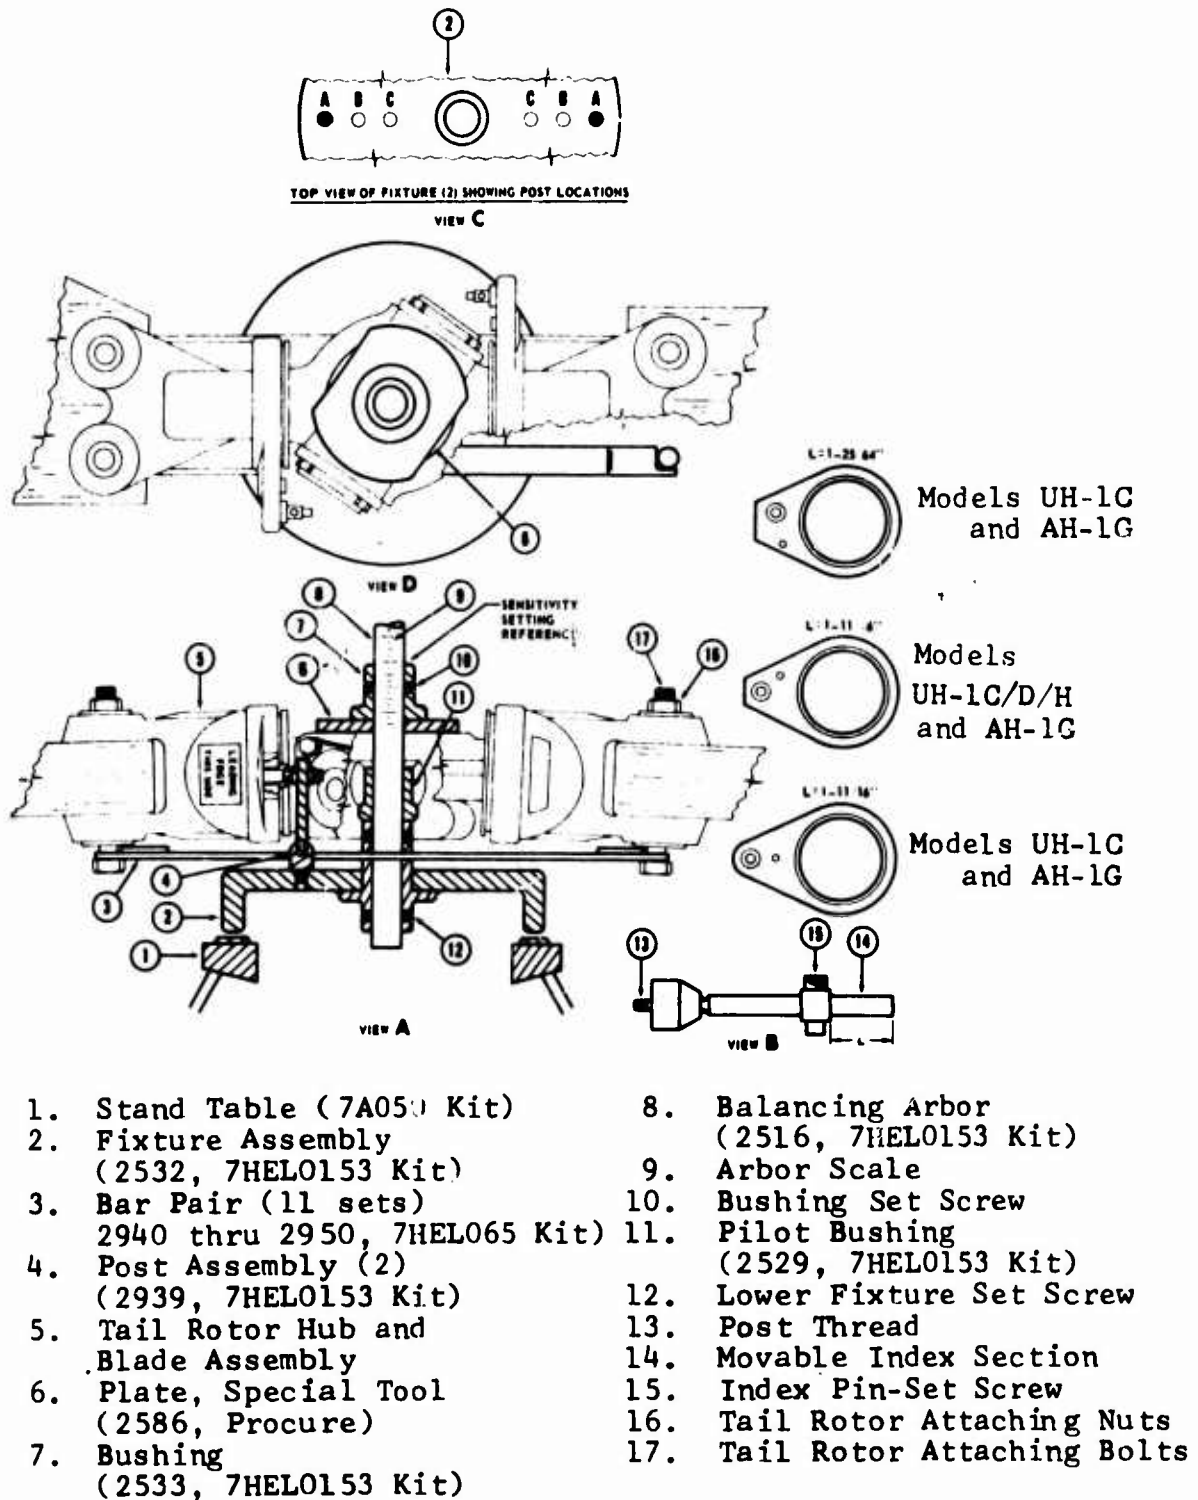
Balancing - Tail Rotor Hub and Blade, Models UH-1C/D/H and AH-1G.
